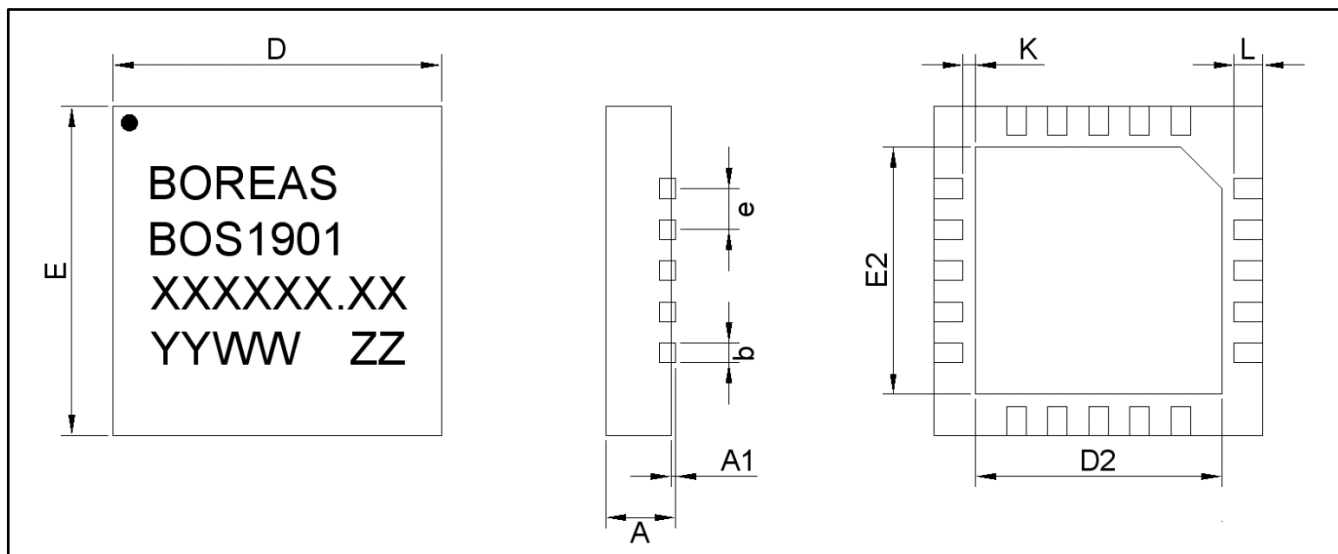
QFN 20L 4.0mm x 4.0mm package outline drawing
